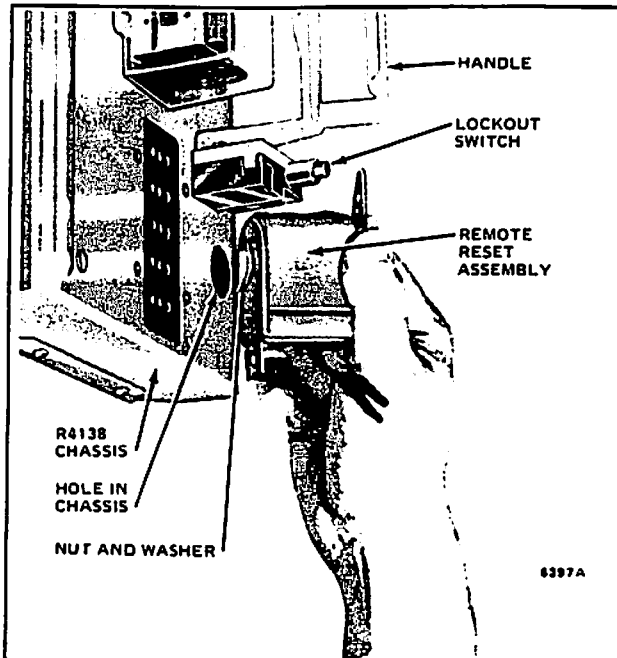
INSTALLING A REMOTE RESET ASSEMBLY.
